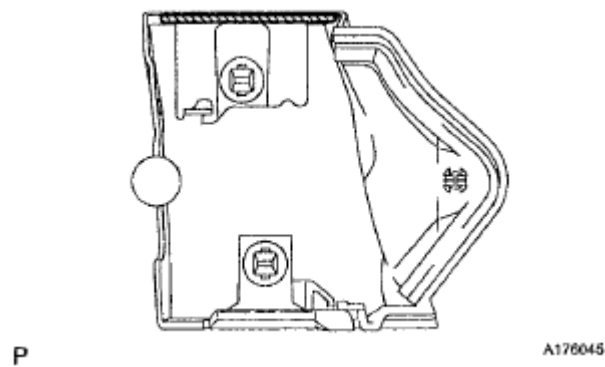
Identifying Front Fender Moulding Sub-Assembly RH
